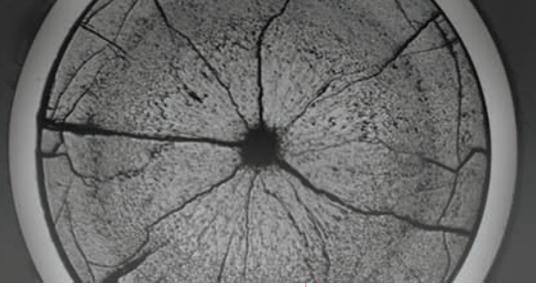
End cap weld cracks observed in PHWR fuel bundle no. 54505.
